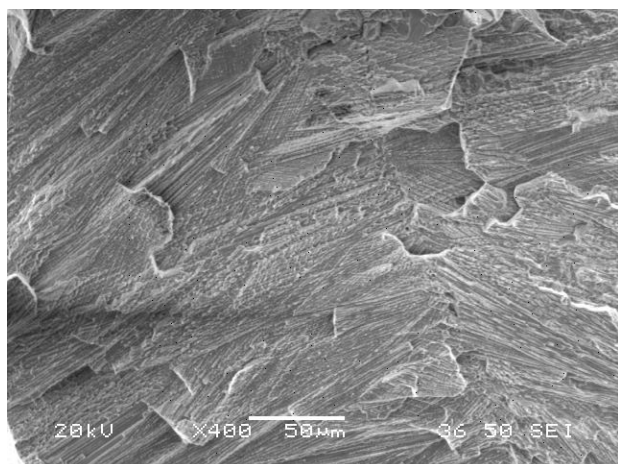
Fracture surface of laser welded joint at X 400 magnification
